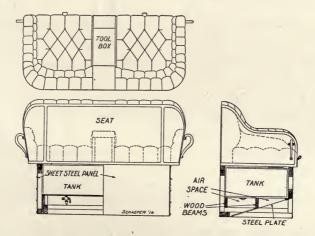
Kelley-Springfield Gasolene Tank Mounting.
